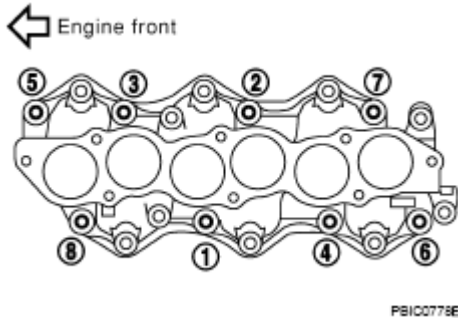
Identifying Intake Manifold Mounting Bolts And Nuts
